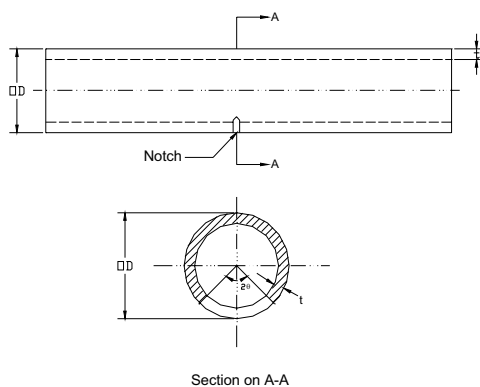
Details of a straight pipe with circumferential through-wall notch
